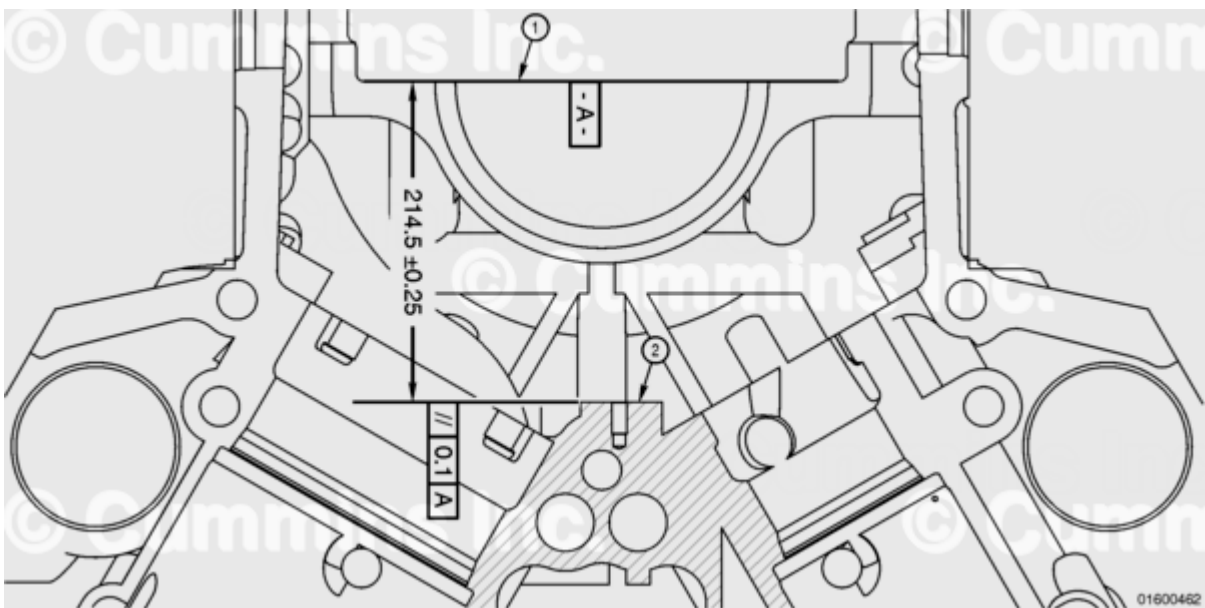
Upper Piston Cooling Nozzle Mounting Pad (1) Datum A, (2) Mounting Pad
